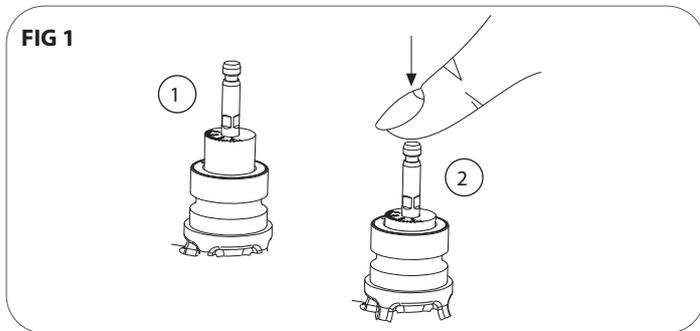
Press down the valve spindle before mounting the actuator on the valve.
